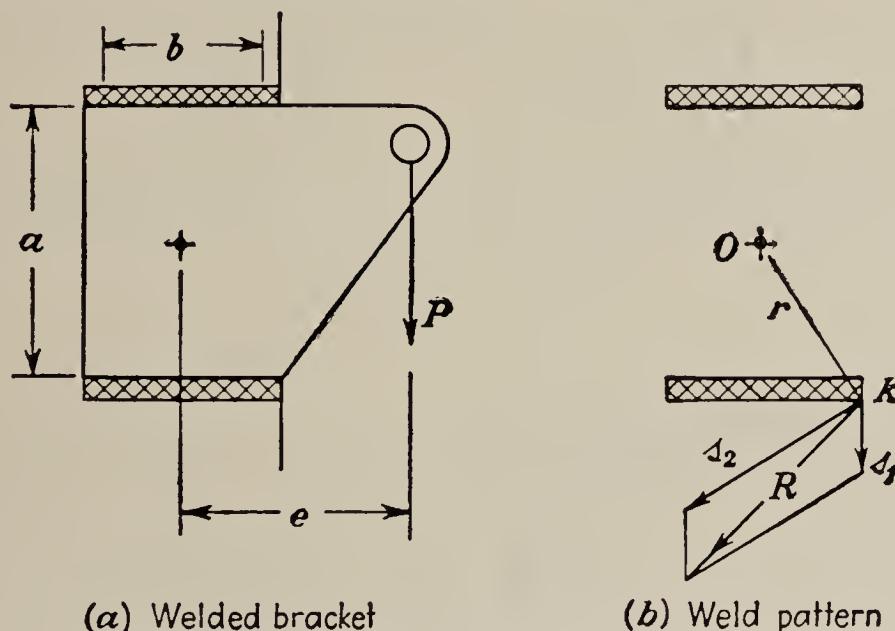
Bracket attached to support by fillet welds.
